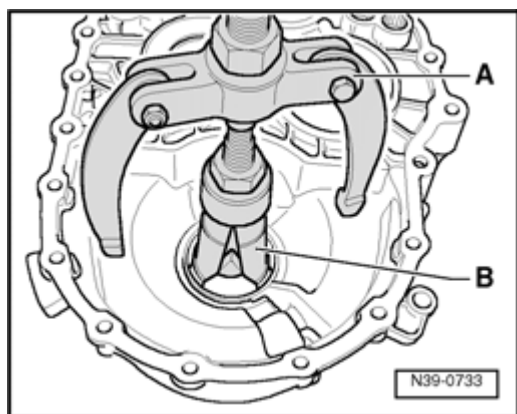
Pulling tapered roller bearing outer race out of clutch housing
